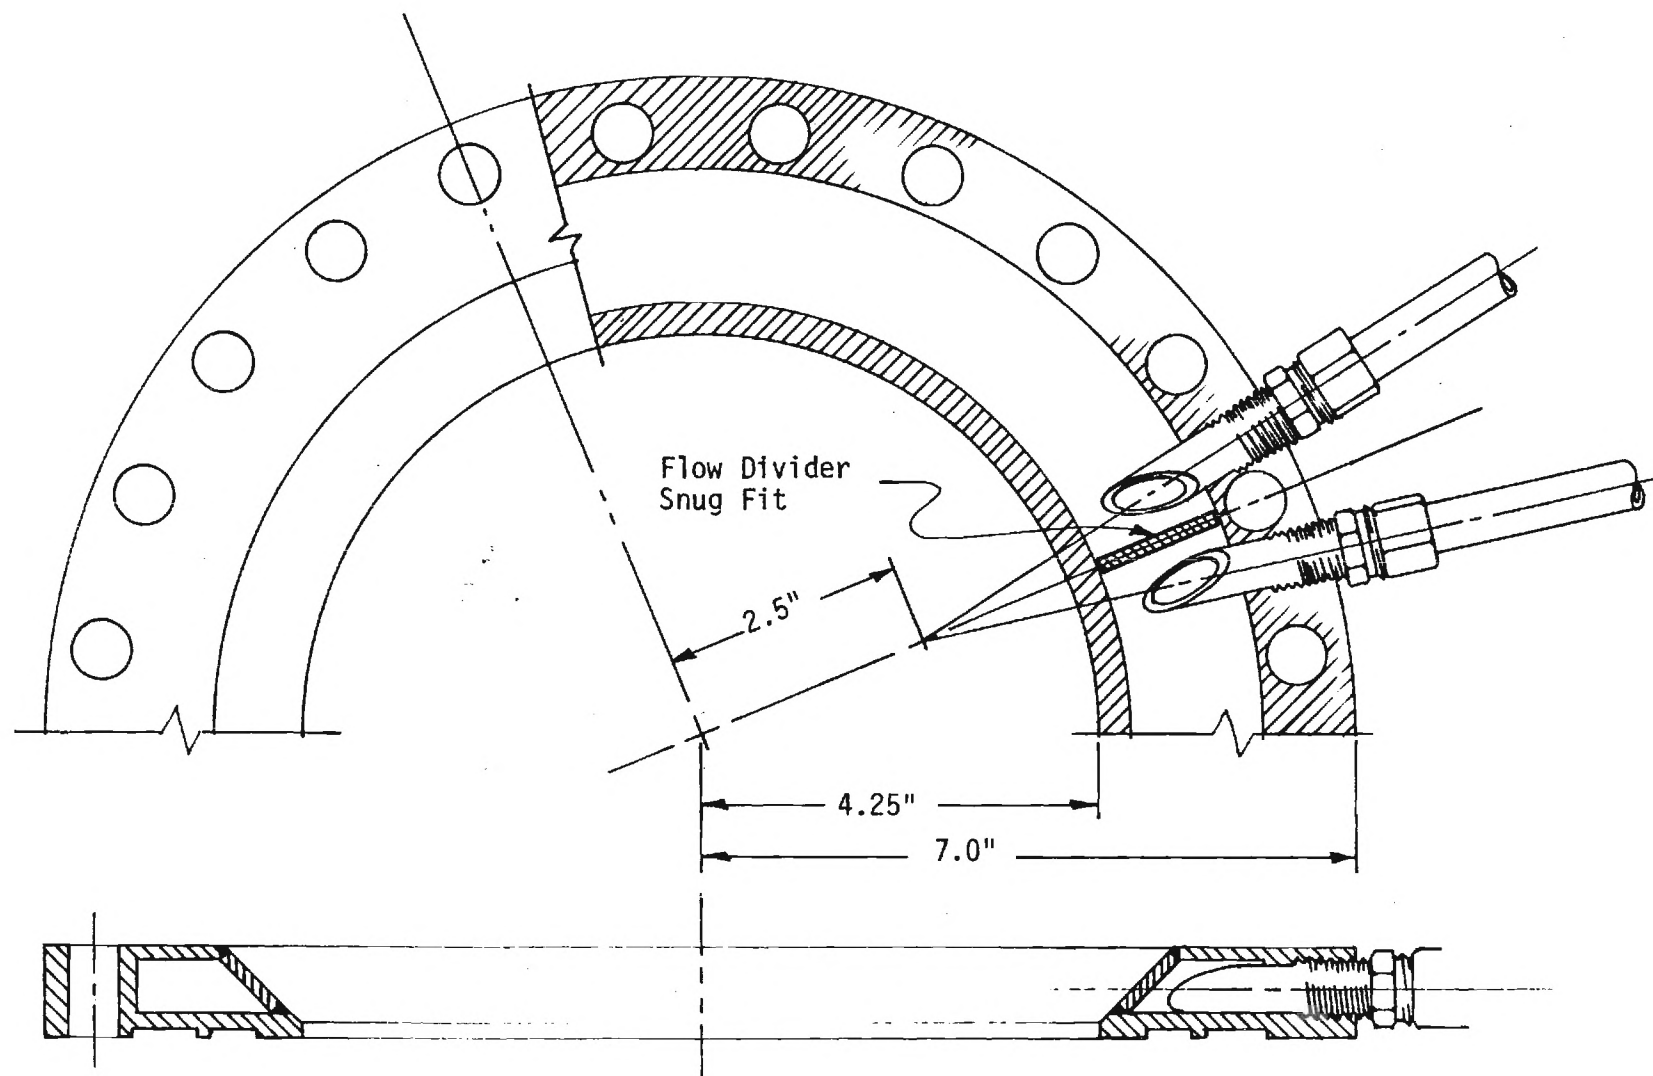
Engineering Drawing of Window Ring for LBL SPHER Receiver.
